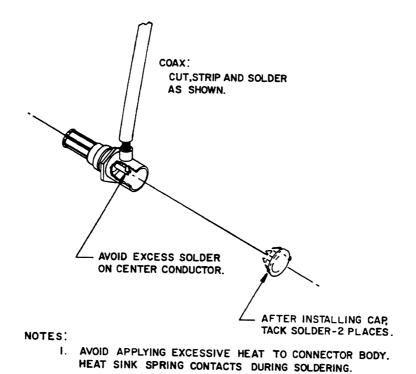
CONNECTOR (P/N 030-00101-0002) ASSEMBLY (Dwg No 696-06328-0000 R0)
